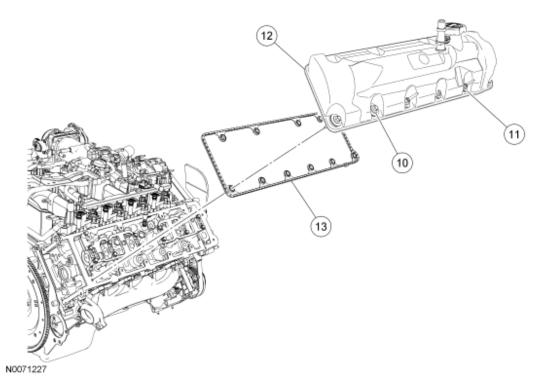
Exploded View Of Right Hand Valve Cover (4 Of 4) Courtesy of FORD MOTOR CO.
